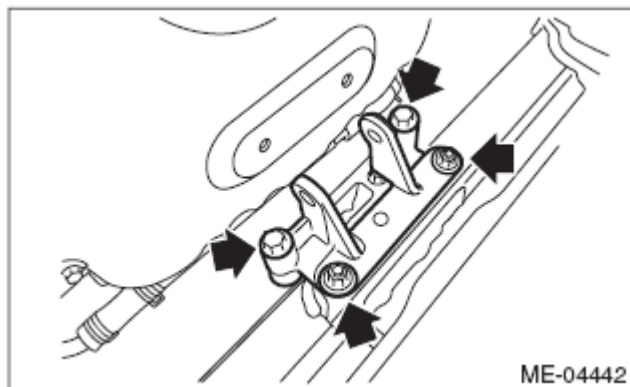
Locating Front Mounting Bracket With Mounting Nuts
